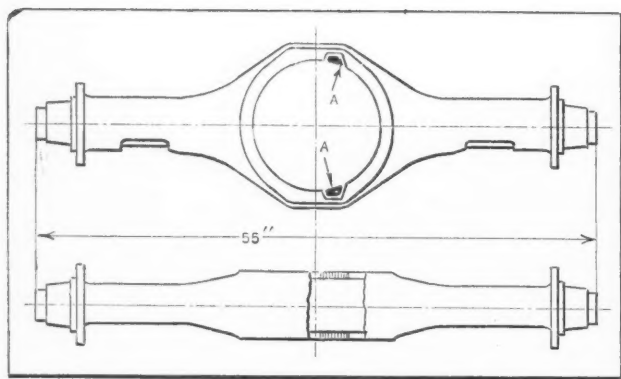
Rear Axle Housing with Clearance Notches Milled at A
